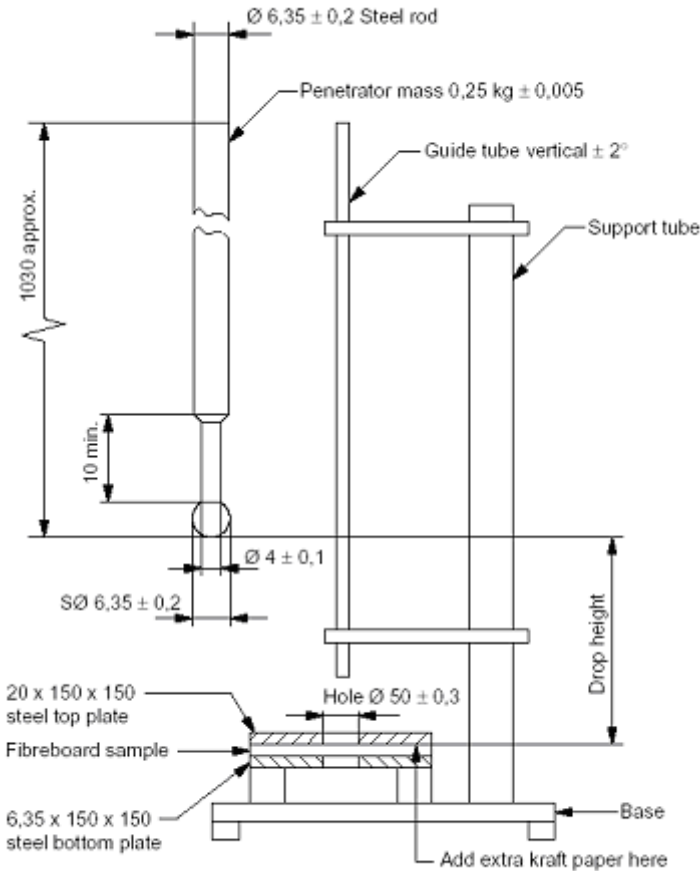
Test fixture for corrugated fibreboard penetration test
